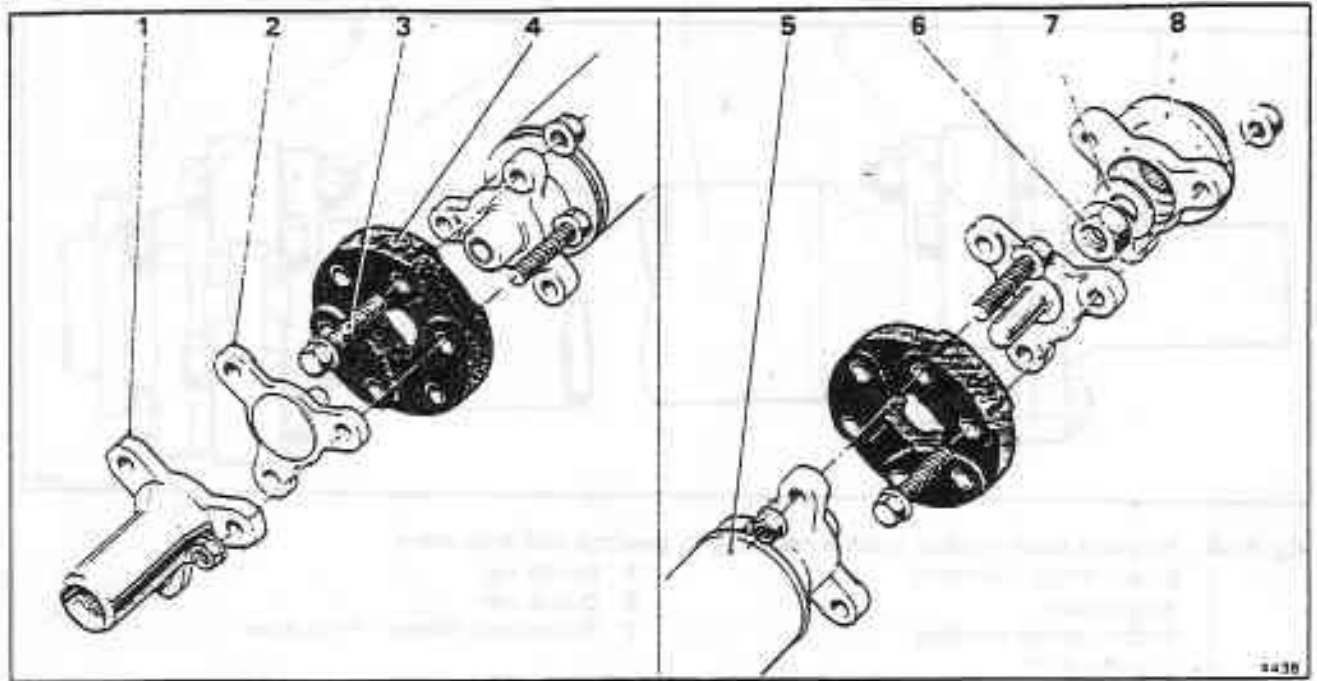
Propeller shaft/rubber flexible couplings - Gearbox and final drive
